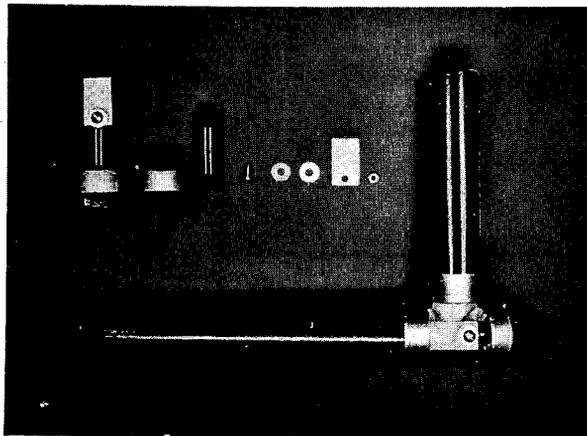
Mounted Pipe-Plug Specimen and Method of Installation.
